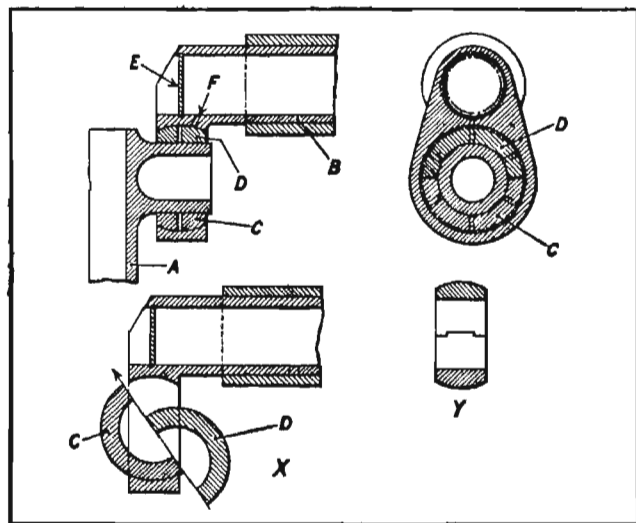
Ball-and-Socket Mechanism for Imparting a Combined Reciprocating and Oscillating Motion to a Sleeve Valve.
